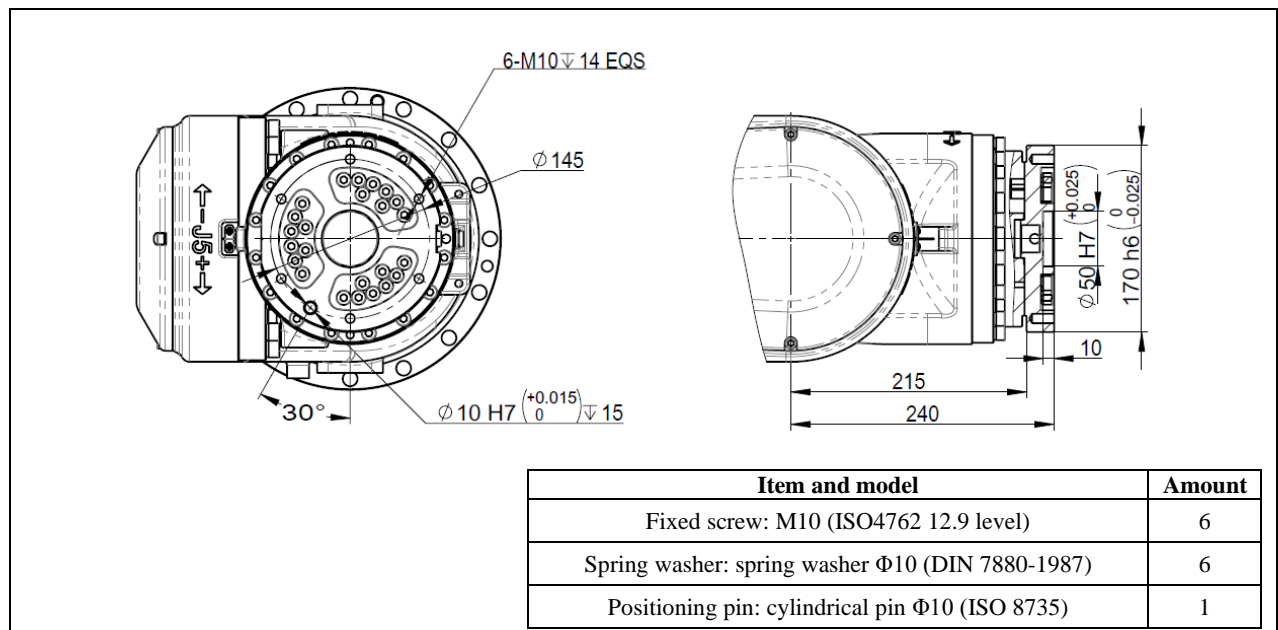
End flange mounting dimension (ER220-3200, ER280-3200, ER280-3200-LI)
